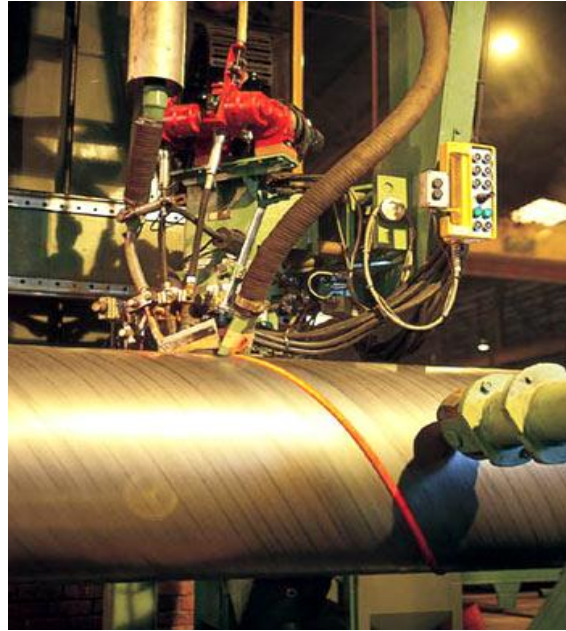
Internal and external welding of spiral welded pipe [Hall Longmore]
